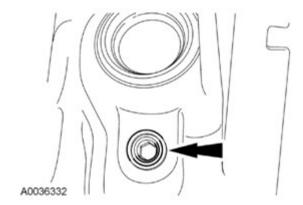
Locating RH Engine Support Insulator Bolts Courtesy of FORD MOTOR CO.
